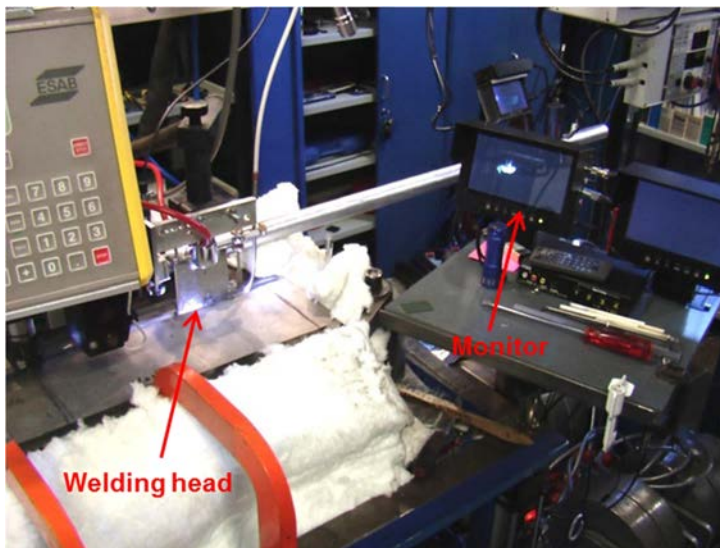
Stiffener plates welded under the pre-mock-up.
